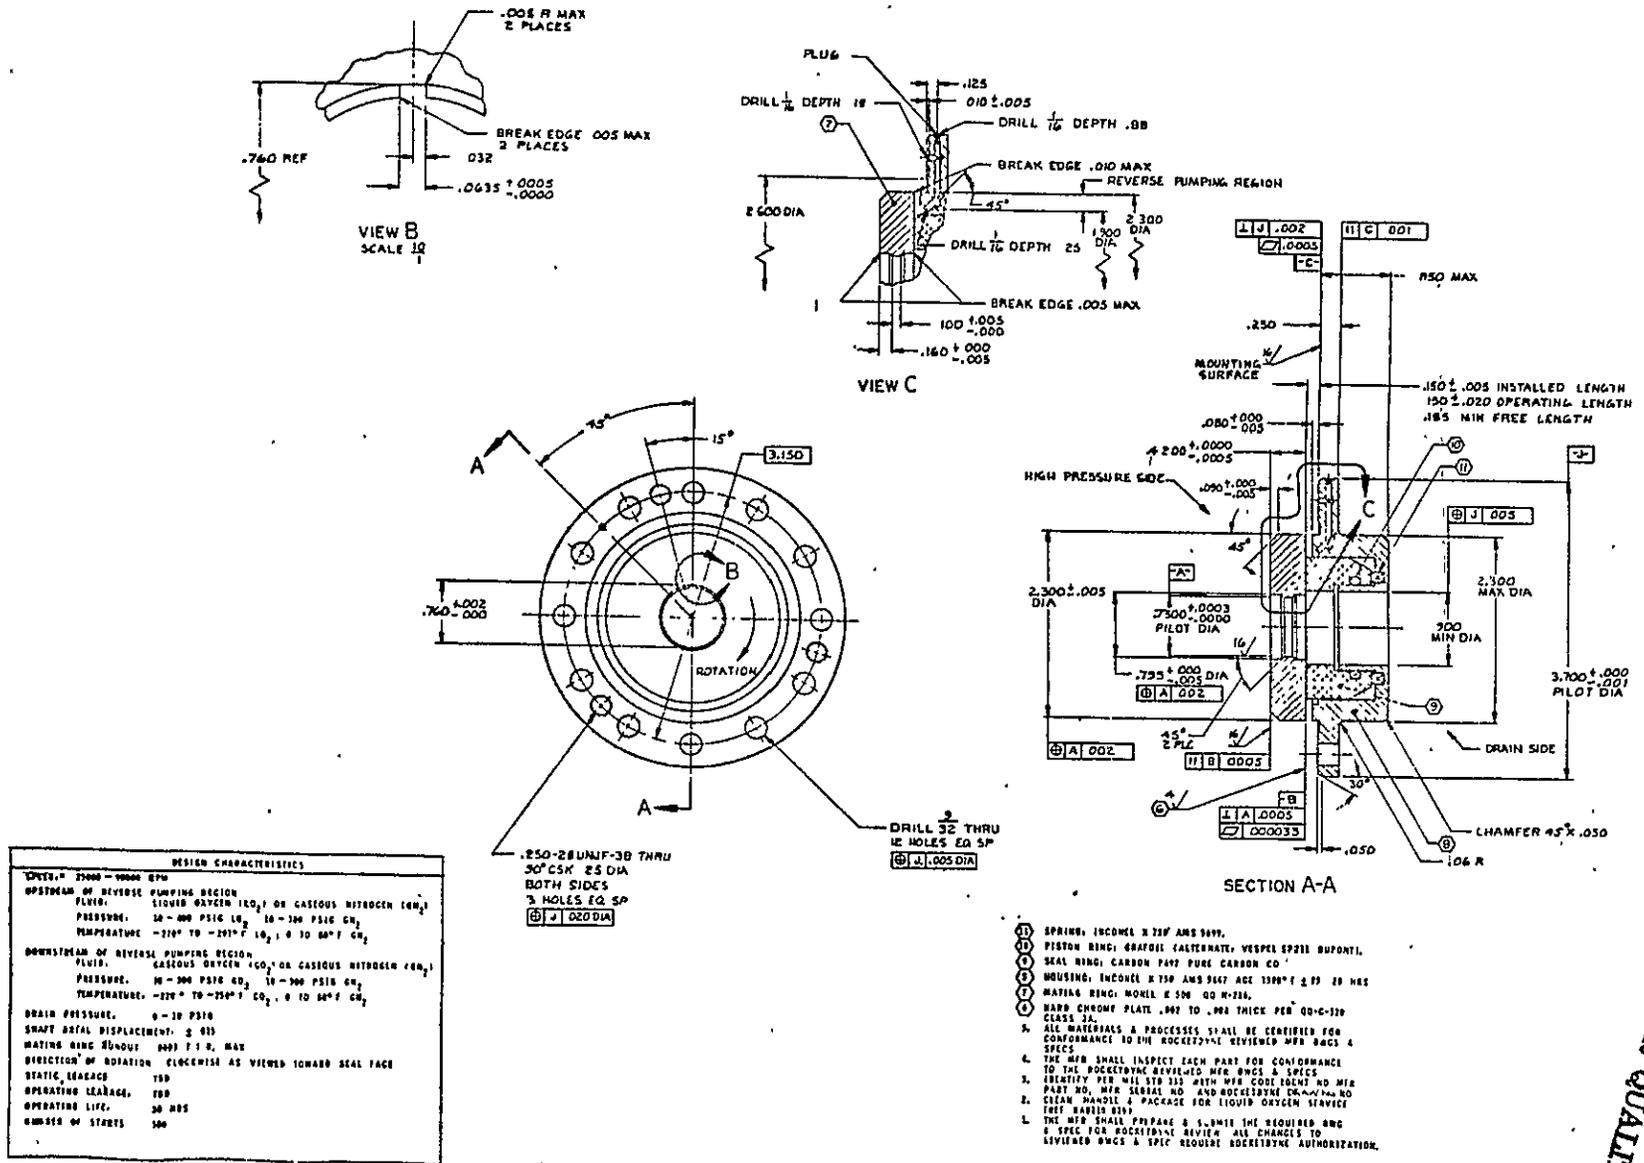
Alternate Spiral Groove LOX Seal Design Specification Drawing
